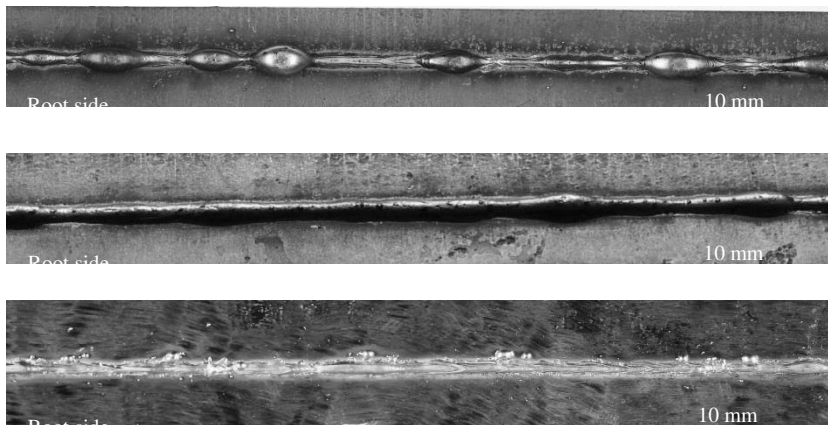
Outer appearances of hybrid laser-arc welds (root side) performed with different welding parameters; weld without parameter adaptation (a); decreased welding wire feeding speed (b); increased welding speed and laser power (c)
